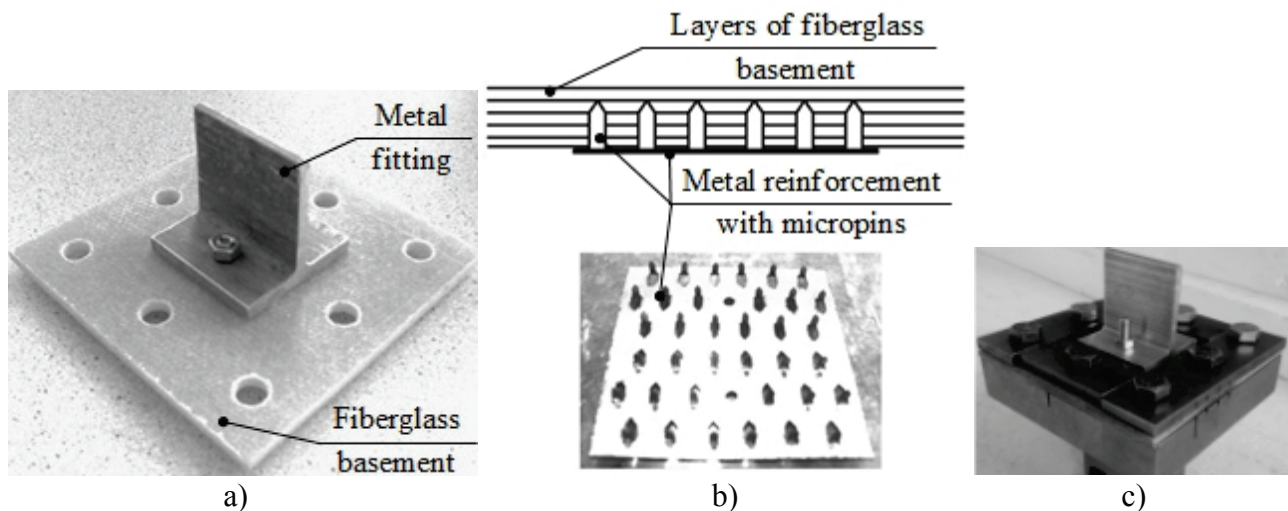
Tested specimens: a) conventional, b) reinforced, c) the test jig assembled with a specimen
